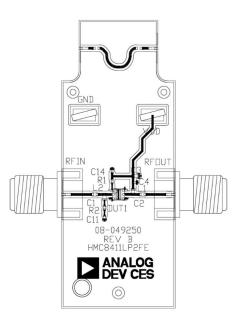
EV1HMC8411LP2F Printed Circuit Board (PCB)
